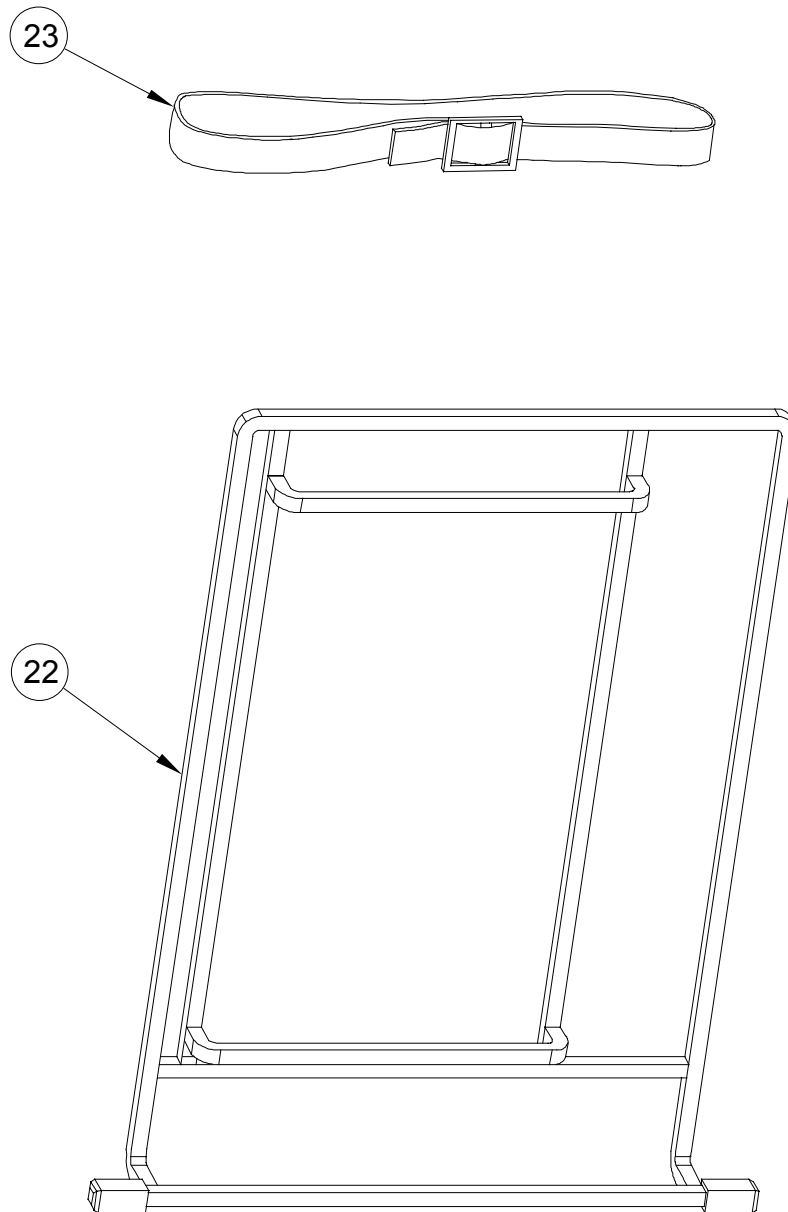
Auxiliary Fuel System (Sheet 2 of 2)
